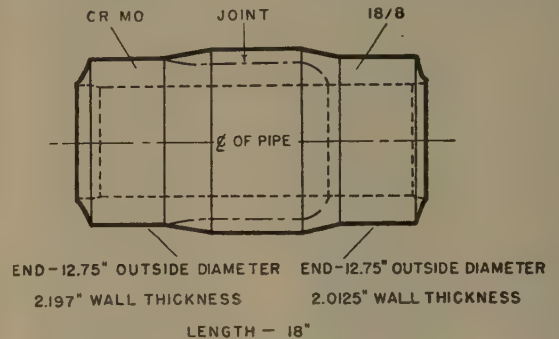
ARRANGEMENT OF KELCALOY PIECE AS FINALLY DESIGNED
